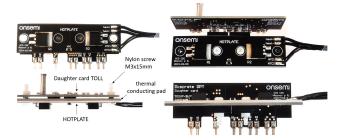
Mounting Hotplate on the Daughter Card TOLL and TO247-4L Package
